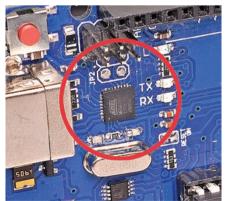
if you apply just the right amount of solder to the QFN pins, with plenty of flux, you should get nice clean joints like these.
